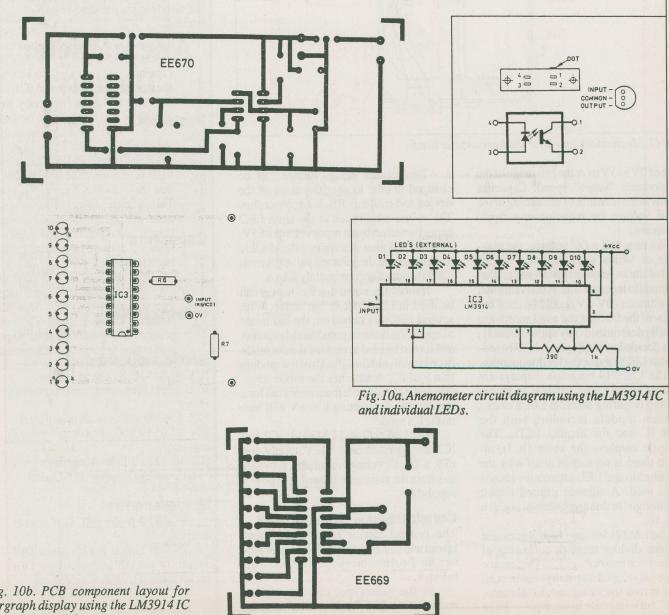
PCB component layout for bargraph display using the LM3914 IC and not the module.
